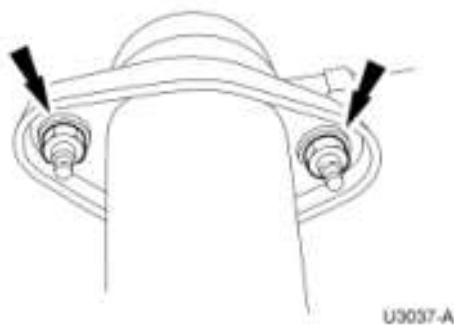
Locating Exhaust Y-Pipe Flange Nuts
